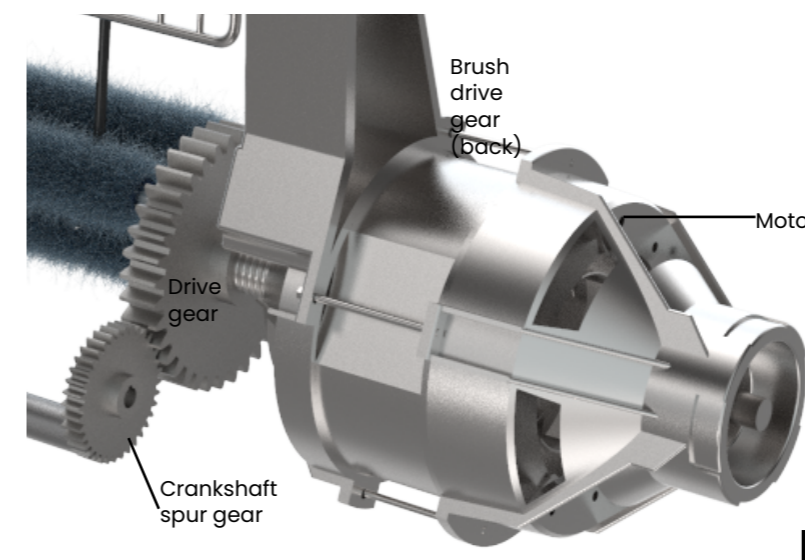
Motor and spur gears for brush and crankshaft actuation.
